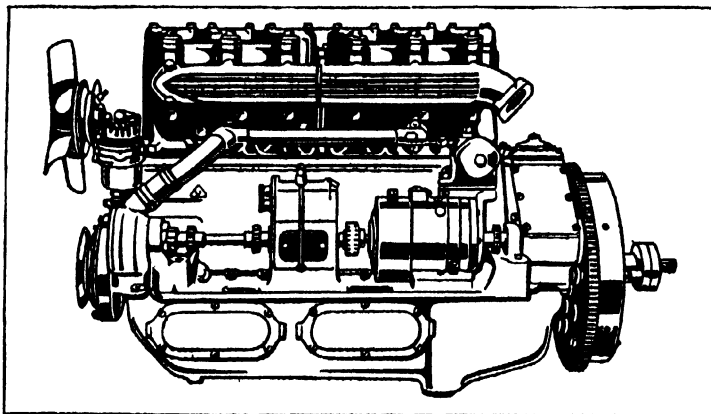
THE 35/120 H.P. 6-CYLINDER DAIMLER SLEEVE-VALVE ENGINE
